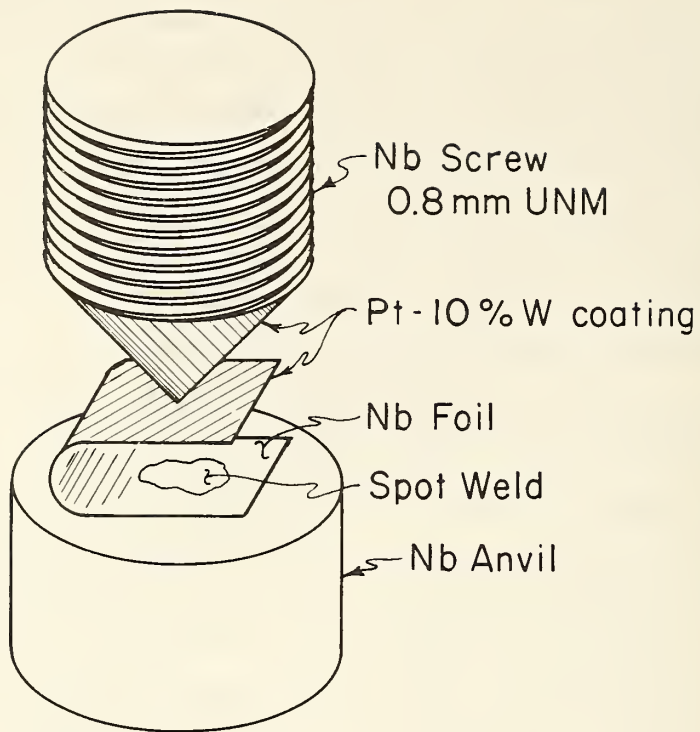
Stabilized point contact. This is a spring-loaded contact between niobium parts plated with a Pt-W alloy.
